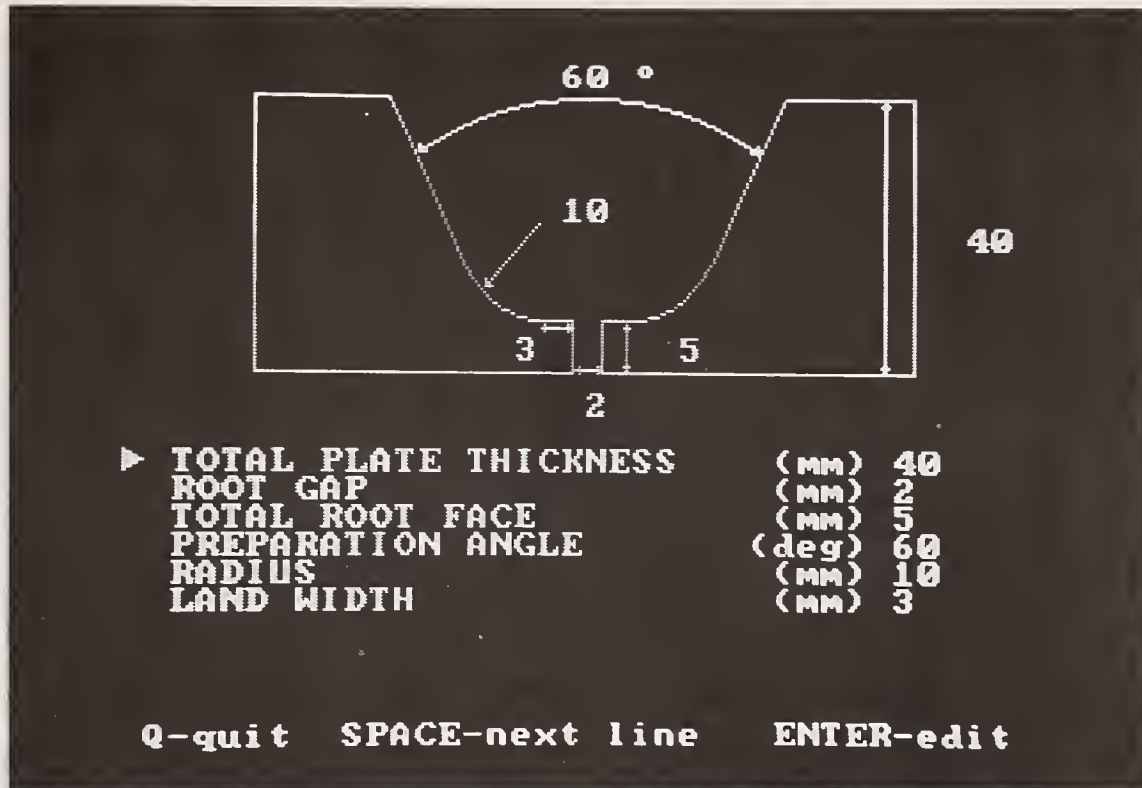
Entering weld dimensions for WELDVOL.
